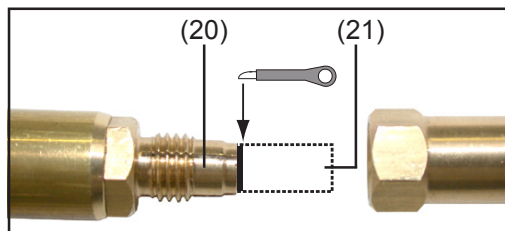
Cutting the inner liner to length, flush with the clamping piece
